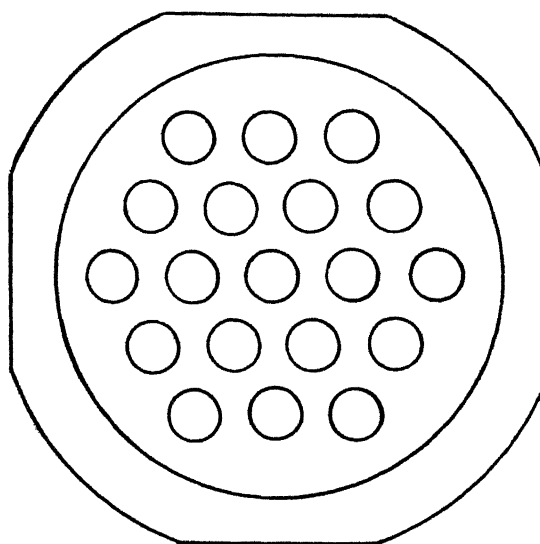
(a) TEMPLATE FOR BAFFLES & TUBE - SHEET
